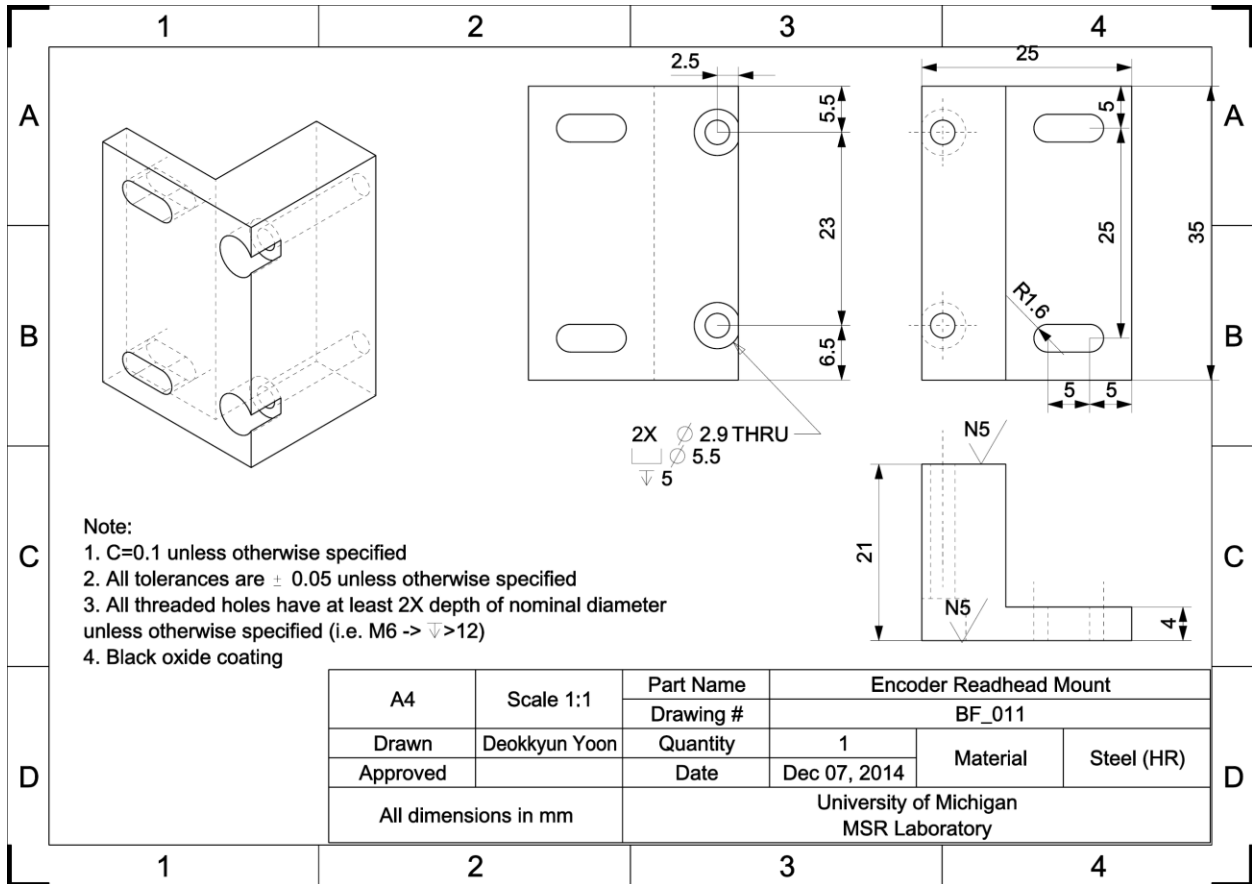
Manufacturing drawing of Encoder Readhead Mount.
